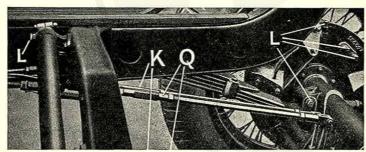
Showing Adjusting Nuts K & Q for Hand and Foot Brakes. Lubricators are 36
